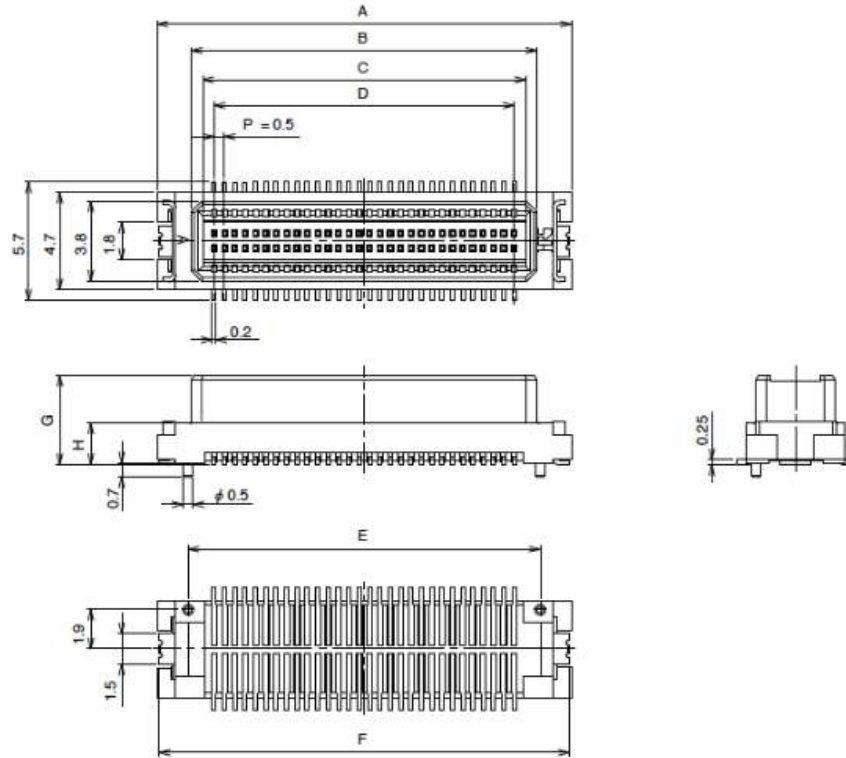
DF17 Board to Board Connector dimensions (Hirose).
